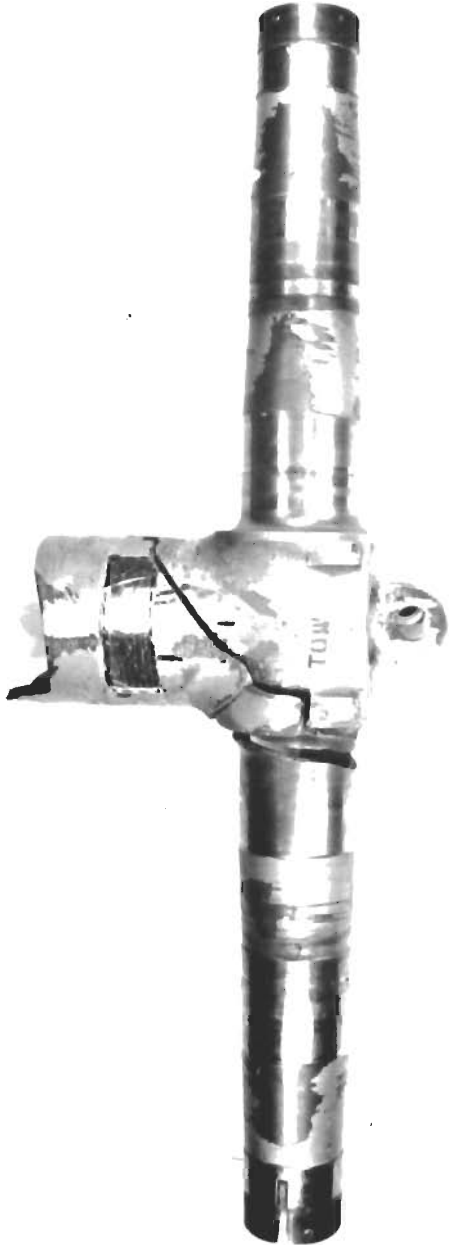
View of Fractured Axle Beam 9/61 AISI 4340 (260-280 ksi UTS)
